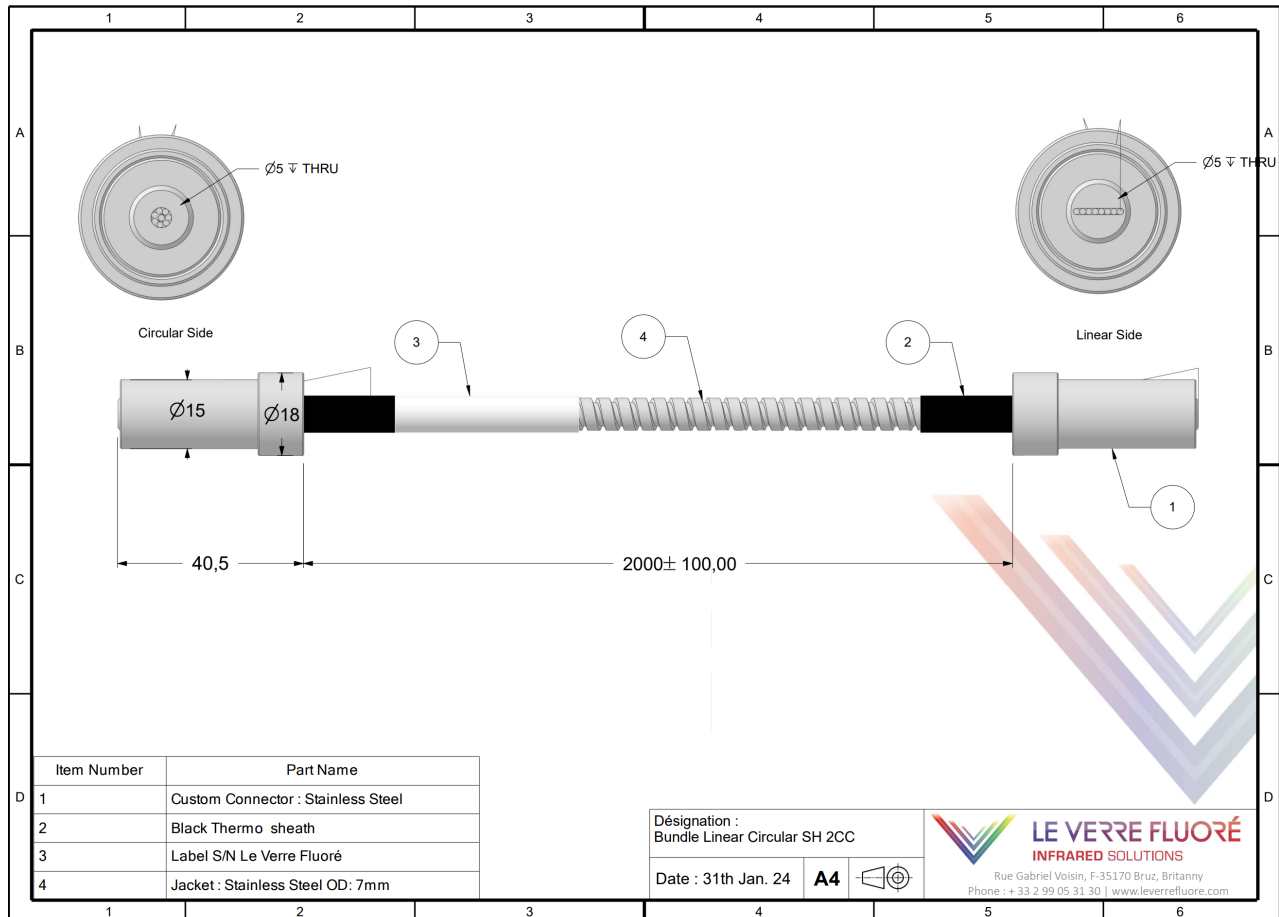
Mechanical drawing of optical fibre provided by Le Verre Fluoré.
